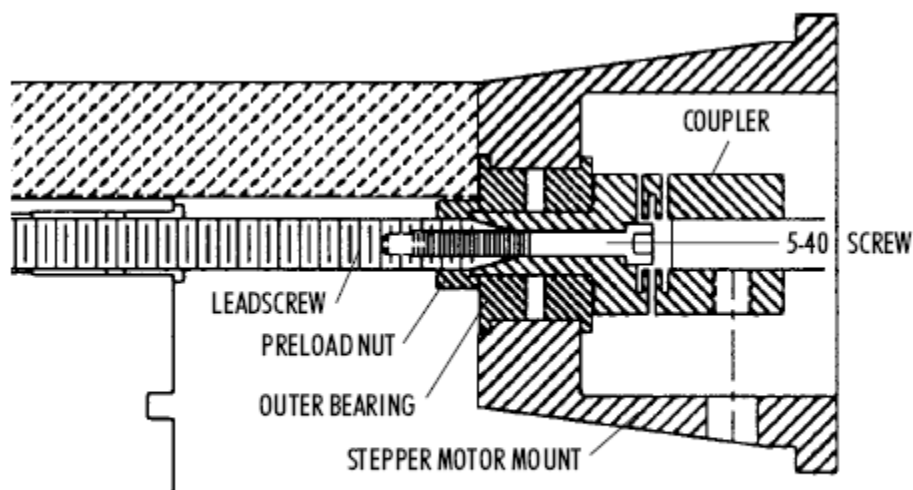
A cross-section of the stepper motor mount shows how the coupler is attached to the leadscrew.
